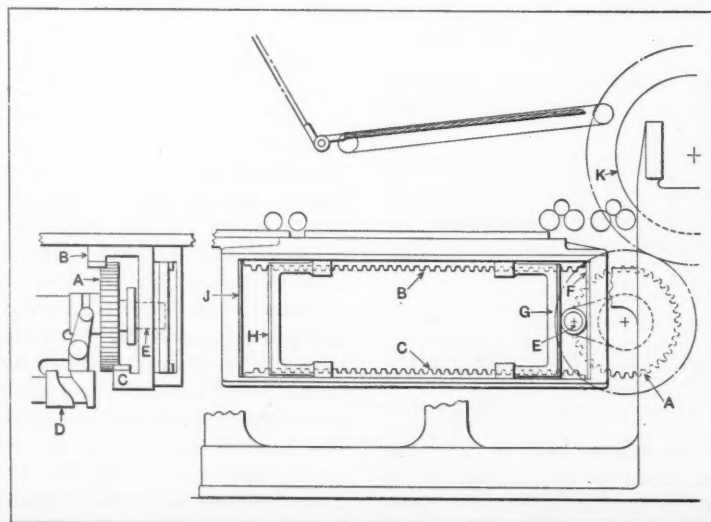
Double-rack Shifting-gear and Crank Combination for traversing Bed of Printing Press
